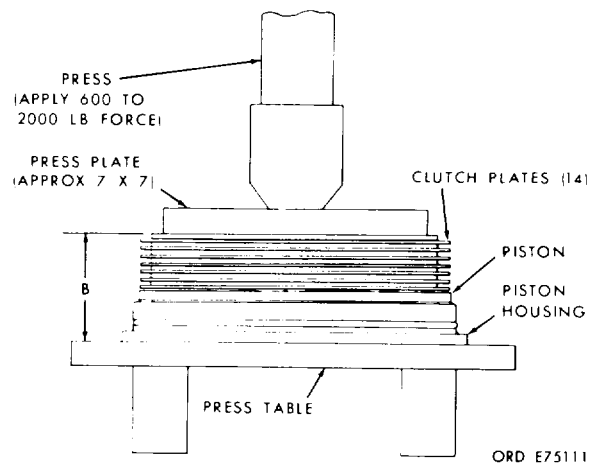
Clutch pack dimension over plates, piston and piston housing.
